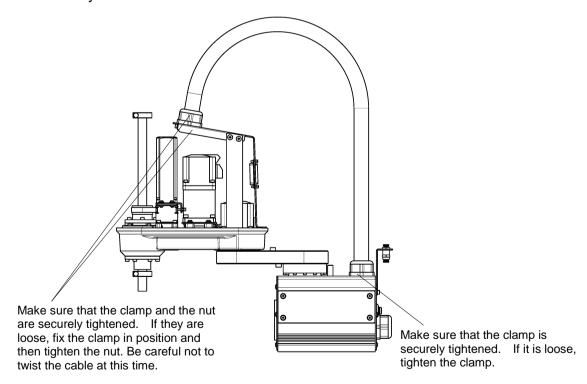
Cable clamp inspection locations (KHL-300, KHL-400)
